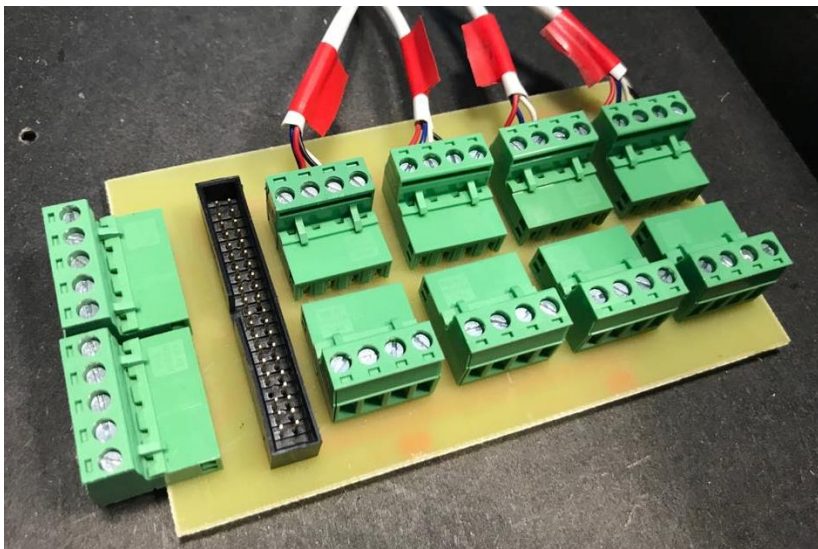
PCB with pluggable screw terminals and a 40-pin header
